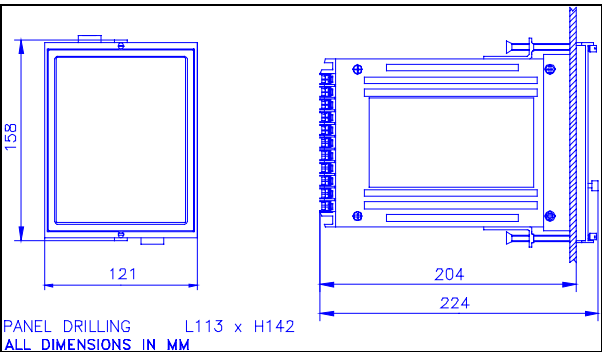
SINGLE MODULE ENCLOSURE MOUNTING
